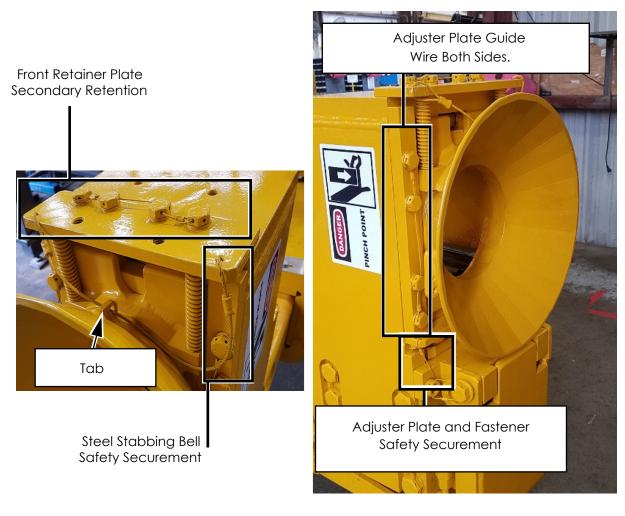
Front Retainer Plate and Stabbing Bell Lock Wiring
